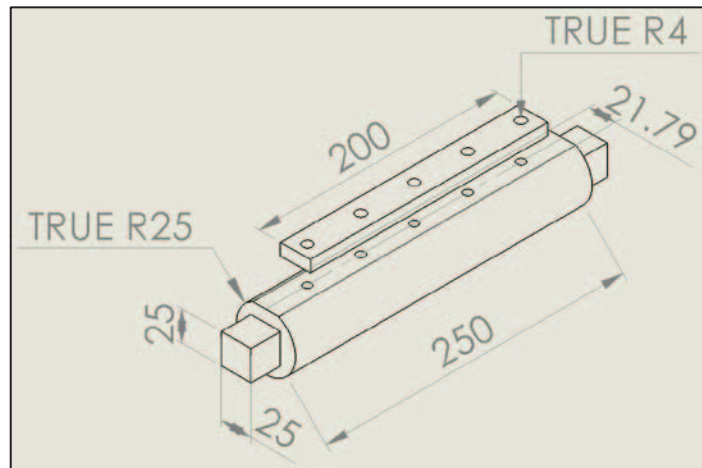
Technical drawing of geogrid clamp using Solidworks (dimensions in mm)
